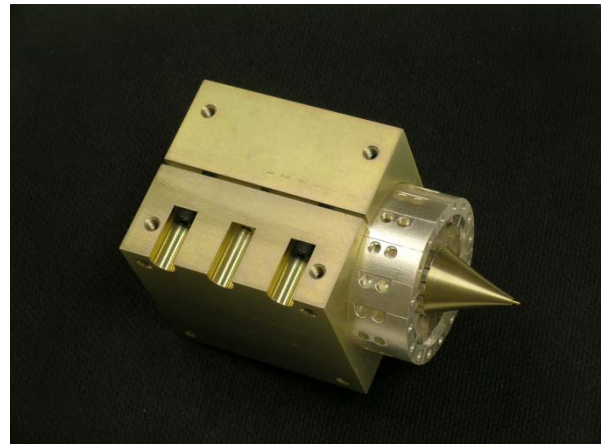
Assembled Second Generation Spatium with End Cap Removed.
